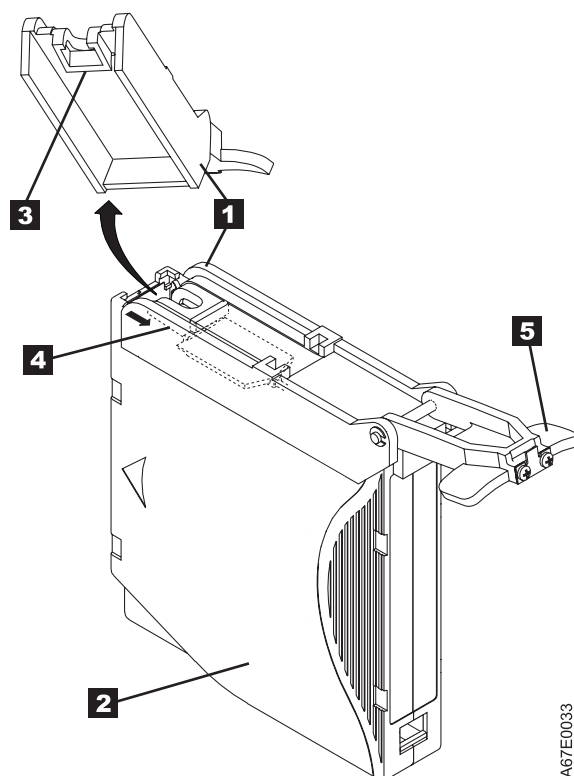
Attaching the leader pin attach tool to an Ultrium Tape Cartridge. To hold the cartridge door open, hook the tool into the door and pull the tool back.
